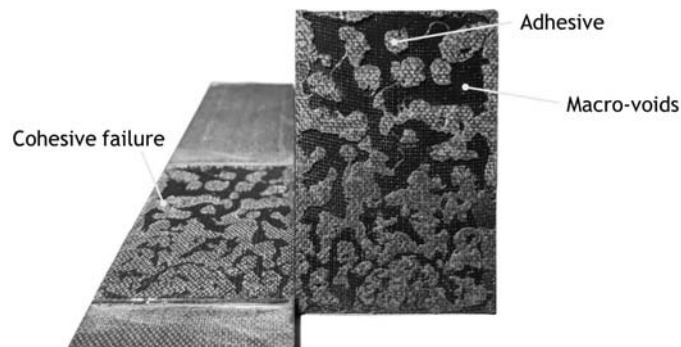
Typical fracture surface of the peel ply treated specimens.
